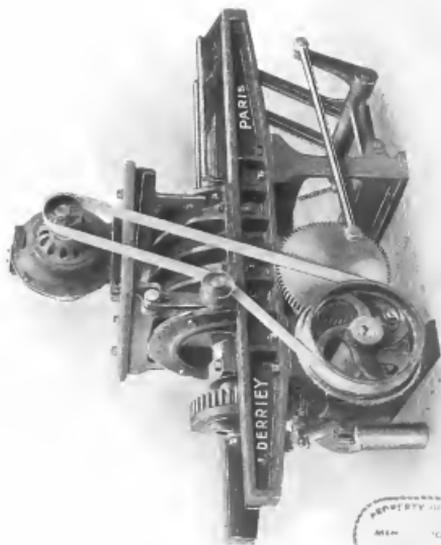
Automatic boring machine for semicylindrical plates.
